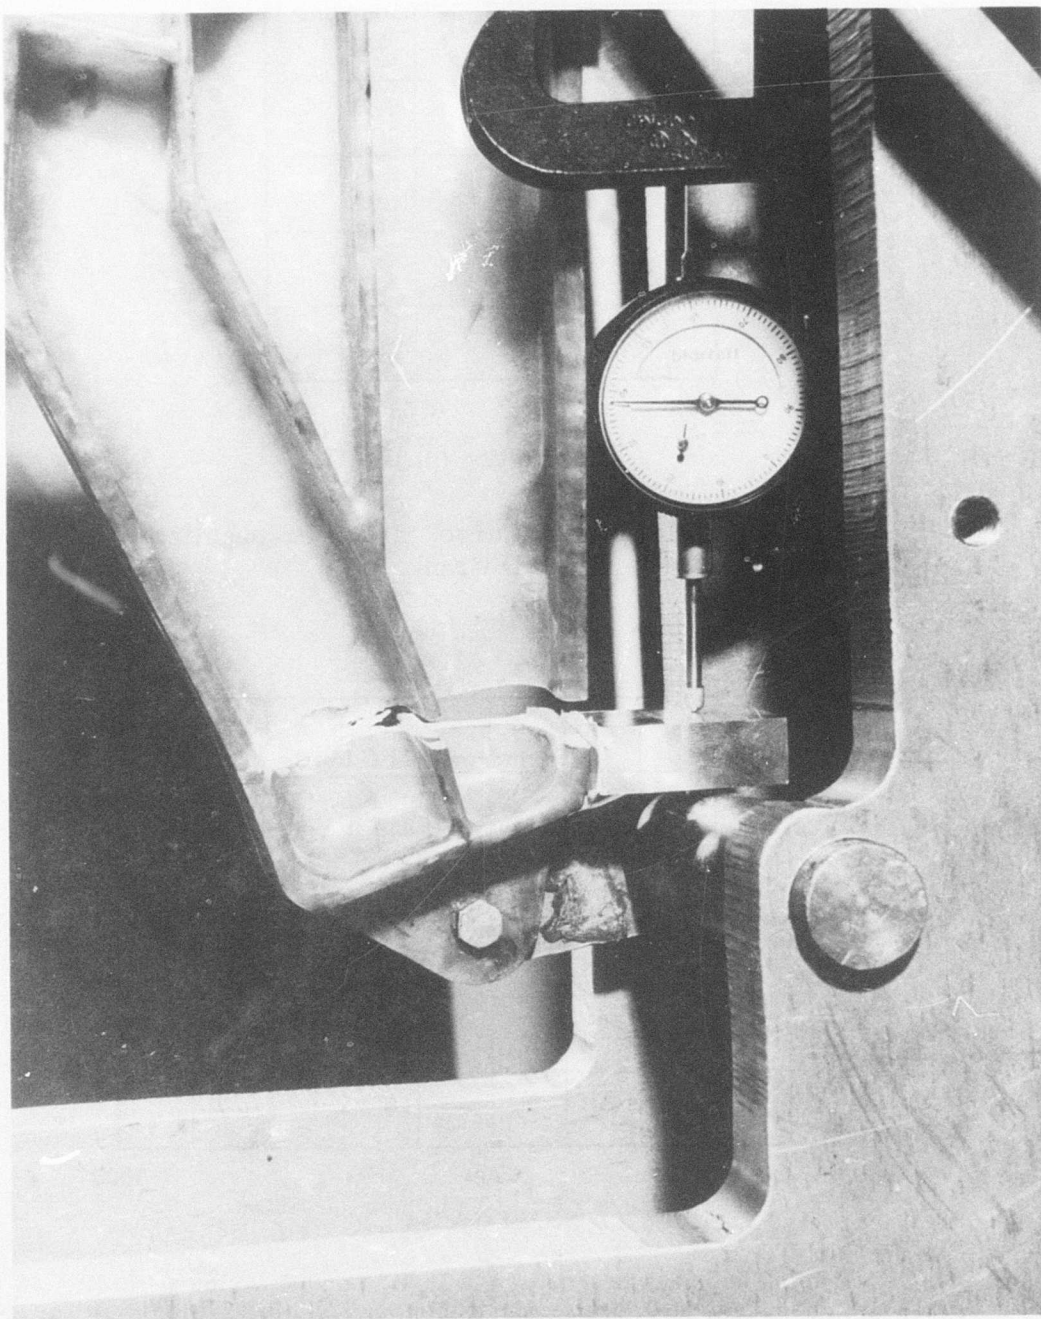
Aft Bell Crank Loaded to Failure - Crack Propagation Test.
